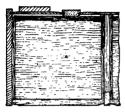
Part Horizontal Section through Dressingchest's Top Drawers.
